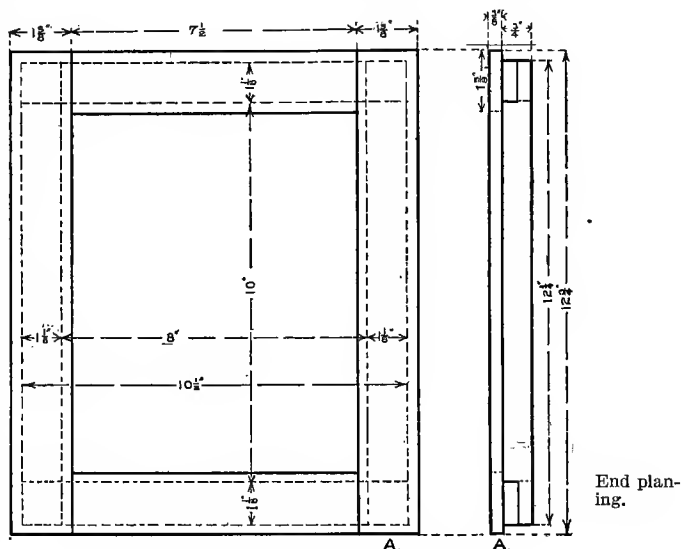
Mechanical Drawing of Lap-Joint Frame
